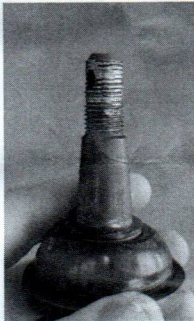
Damage Resulting from Improper Installation of Tapered Bushing
